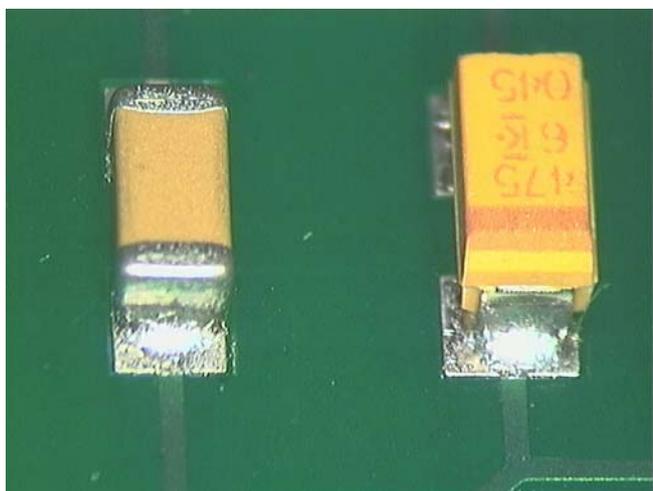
Reflowed solder joints on C1206 and tantalum on side A
